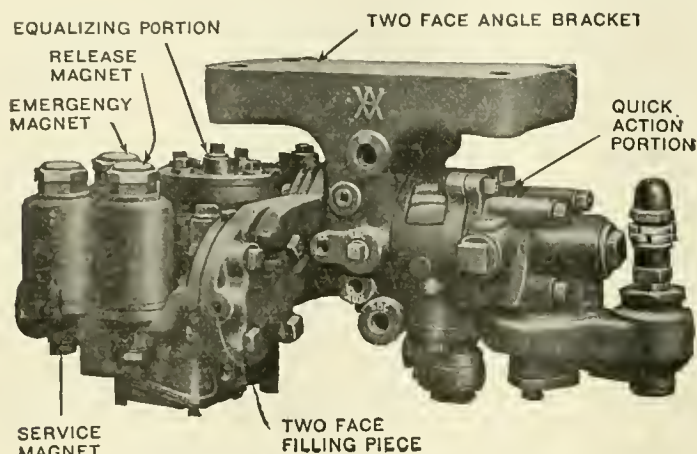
TYPE U COMMON STANDARD UNIVERSAL VALVE.
